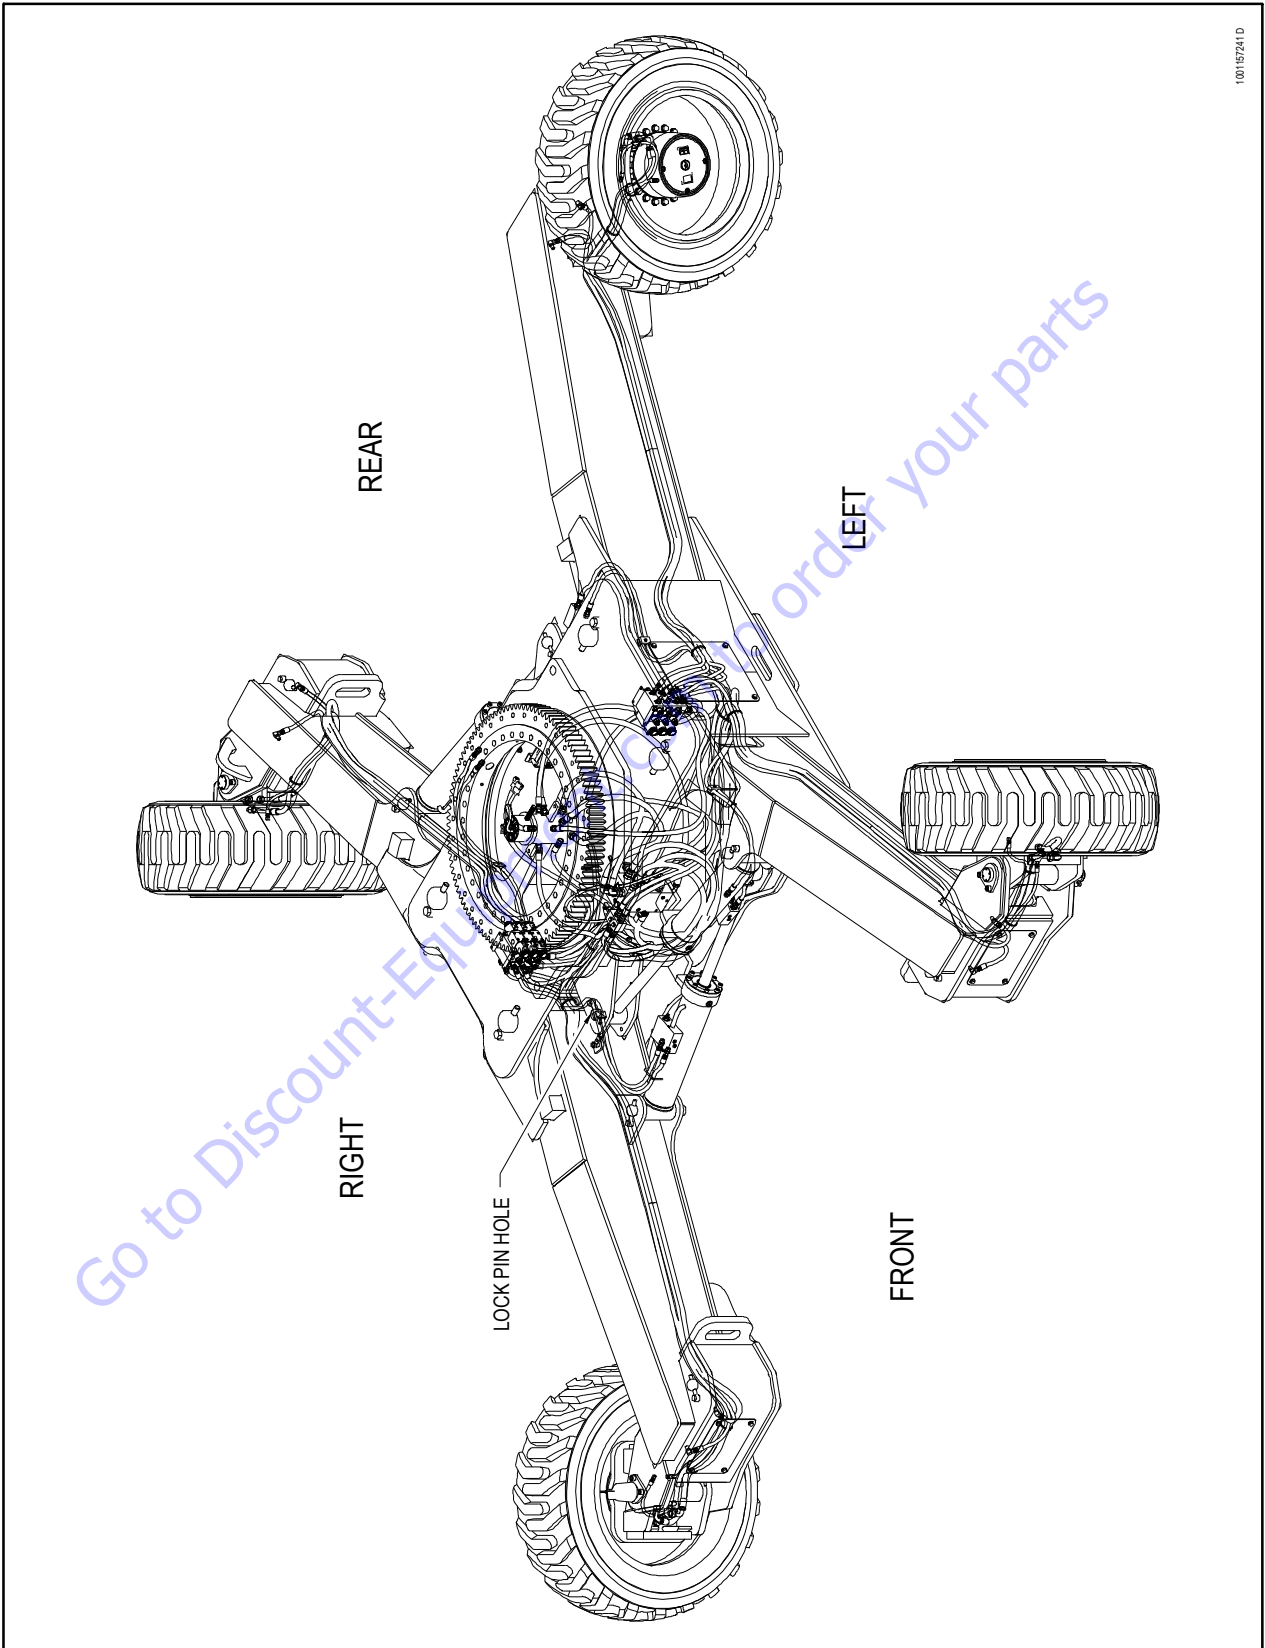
Chassis Hose Routing - Sheet 1 of 7
